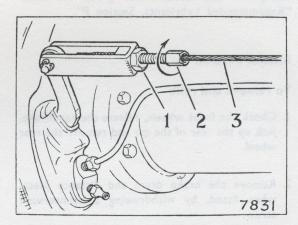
The handbrake cable adjuster, the arrow indicates the direction of rotation to shorten the cable.
